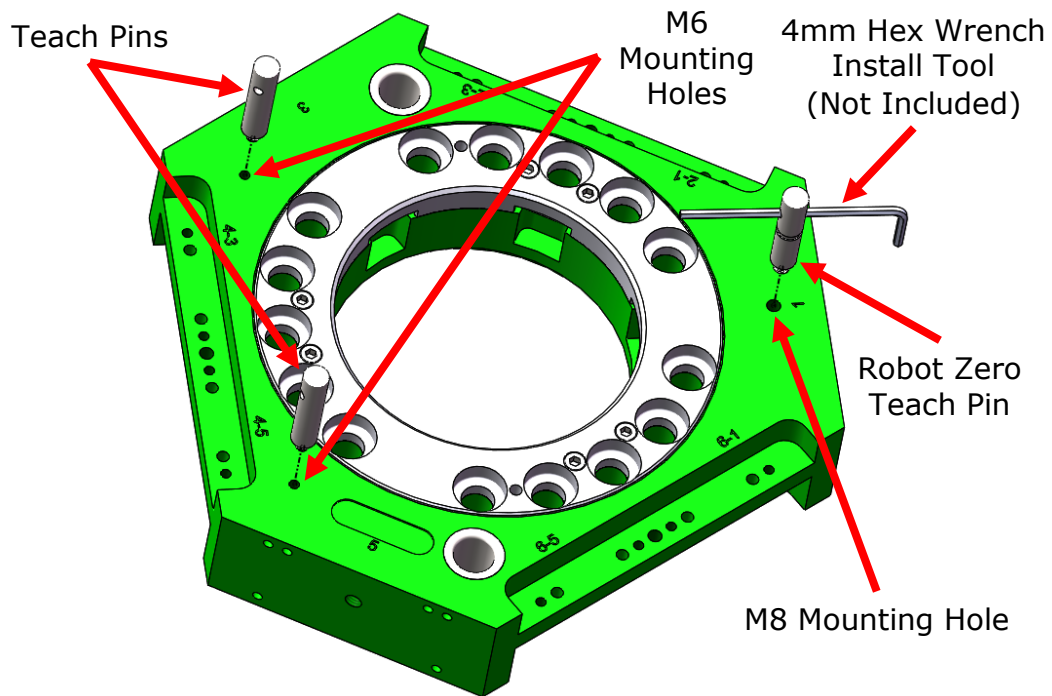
Teach Pin Mounting – E200 Tool Side
